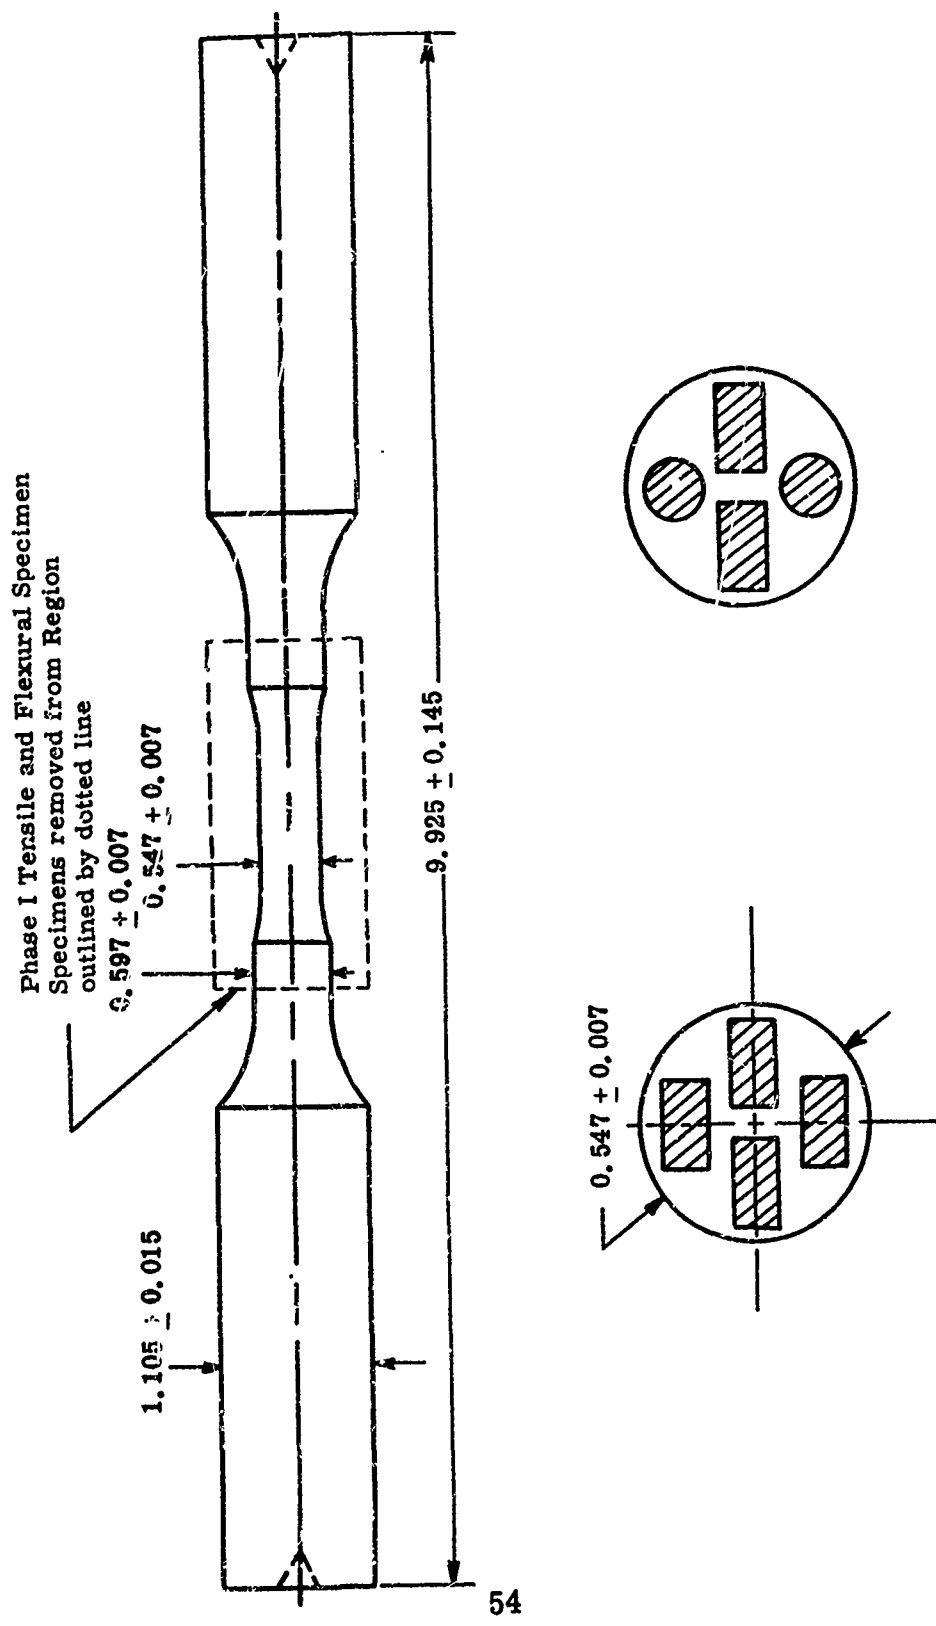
Configuration of Specimen Blank 1831-A-4 as received from Coors and Cutting Plan for Removing Phase I Macro Tensile and Macro Flexural Specimens
